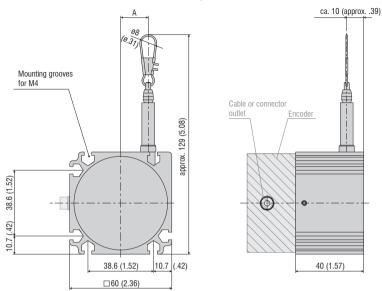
Dimensional drawings WDS- ... - P60 - XX - XXX, dimensions in mm (inches, rounded-off)
